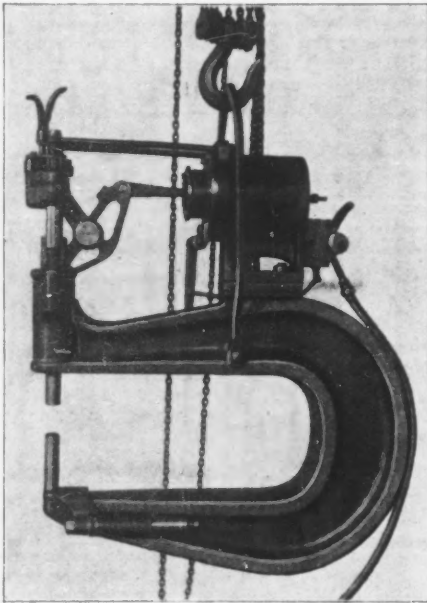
A Portable Pneumatic Riveter with a 36-in. Reach and an 18-in. Gap.
